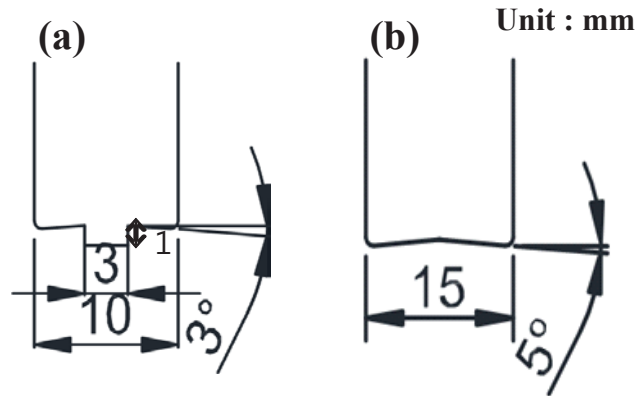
(a) TFSSW 1stage tool (b) TFSSW 2stage tool.
